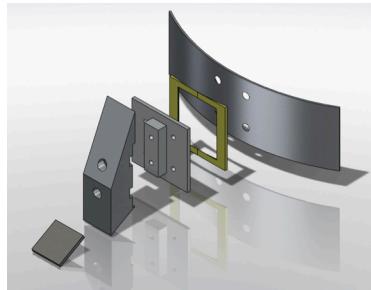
MIRROR MOUNT CAD MODEL VIEW
